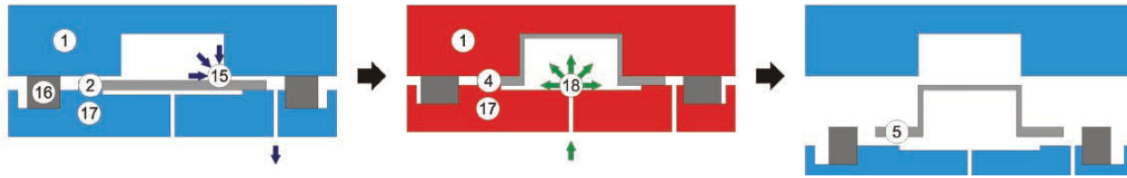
Simplified scheme of microthermoforming with compressed gas-micro pressure forming with a "negative" mould formation. (1) micromould, (2) thin thermoplastic film, (4) softened and formed film, (5) solidified thermoformed film, (15) vacuum, (16) axial seal, (17) counter plate with openings for evacuation and gas pressurisation, (18) compressed nitrogen; blue represents cold parts and red heated[5]. [Adapted from: "Thermoforming of Film-Based Biomedical Microdevices", Roman Truckenmüller, Stefan Giselbrecht, *et al.*].
